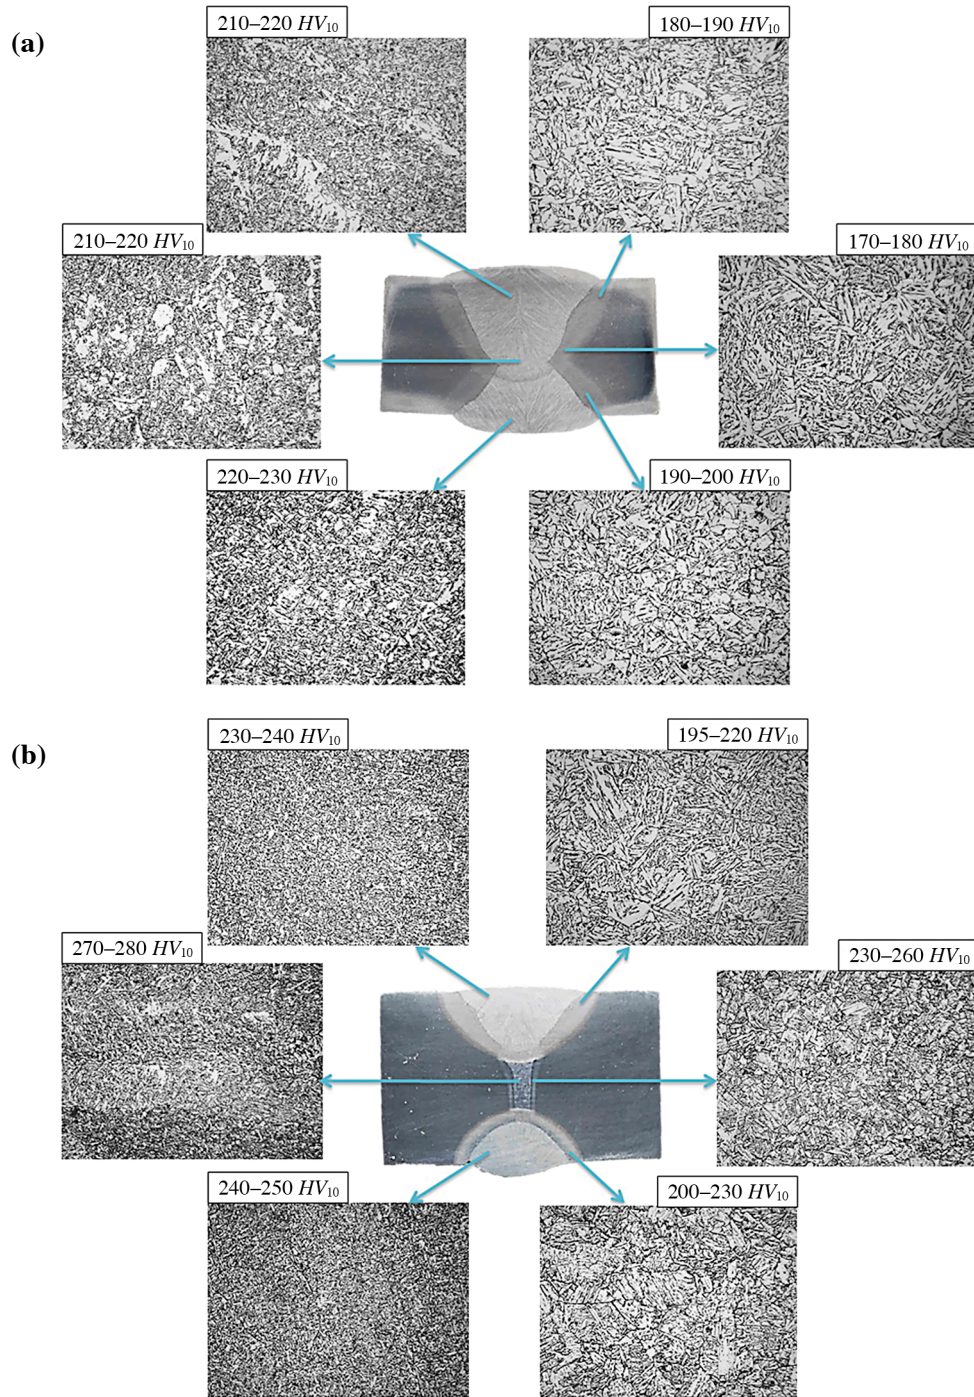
Macro- and microstructures of welded joints obtained by SMAW (a) and LHW/SMAW combination (b), $\times 500$.
